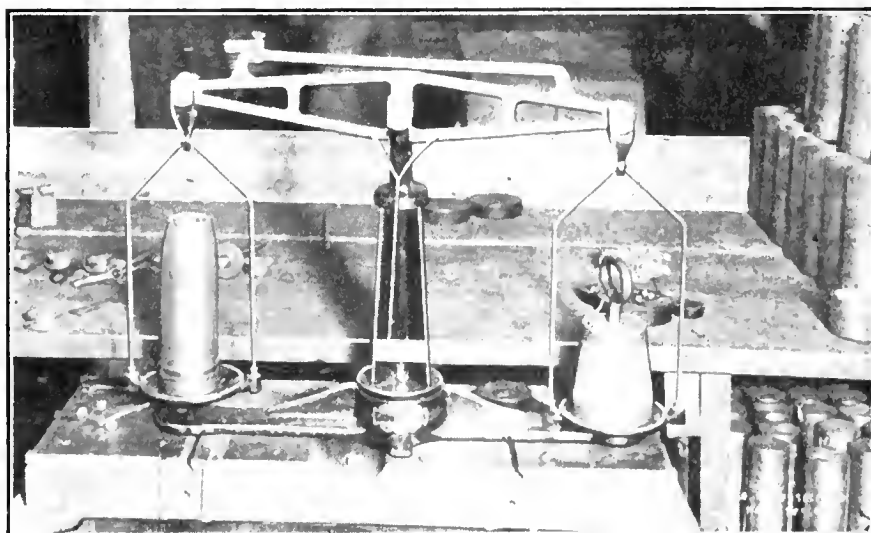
INSPECTION BENCH SHOWING A FEATURE IN THE USE OF A SINGLE WEIGHT TO TAKE THE PLACE OF SEVERAL STANDARD WEIGHTS.
